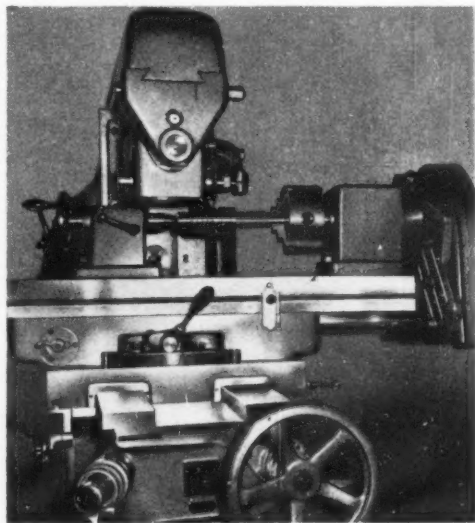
Application of an attachment for milling worms on a Rigiva horizontal milling machine by means of a disc-type cutter
